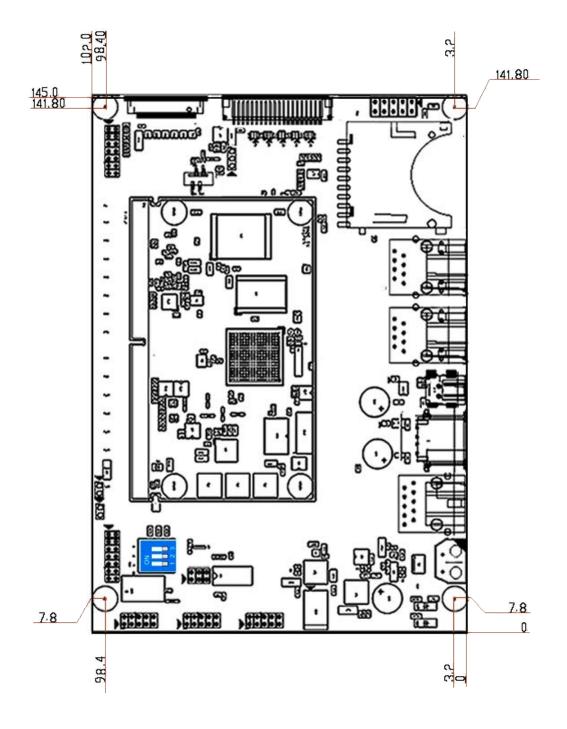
SBC-SMART-BEE Mounting Holes Mechanical Drawing Information
